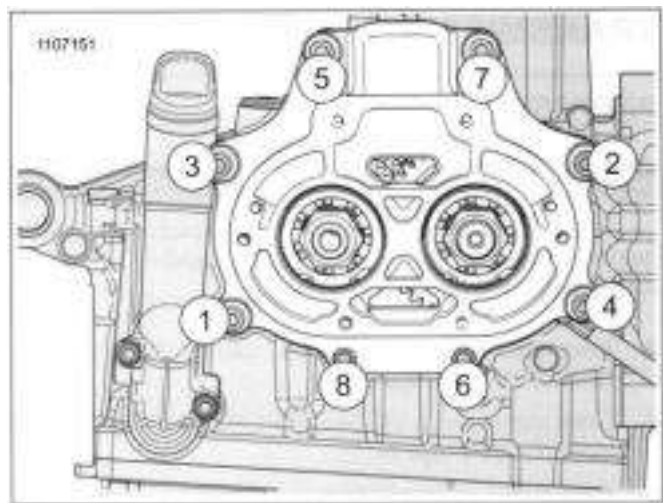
Transmission Bearing Housing Tightening Sequence
